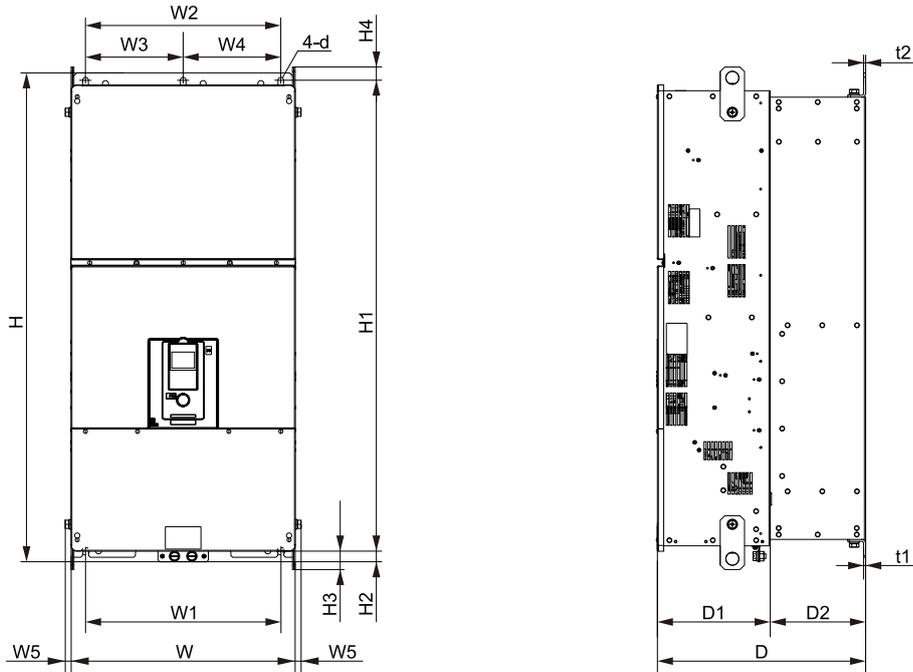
Exterior and Mounting Dimensions Diagram 9
